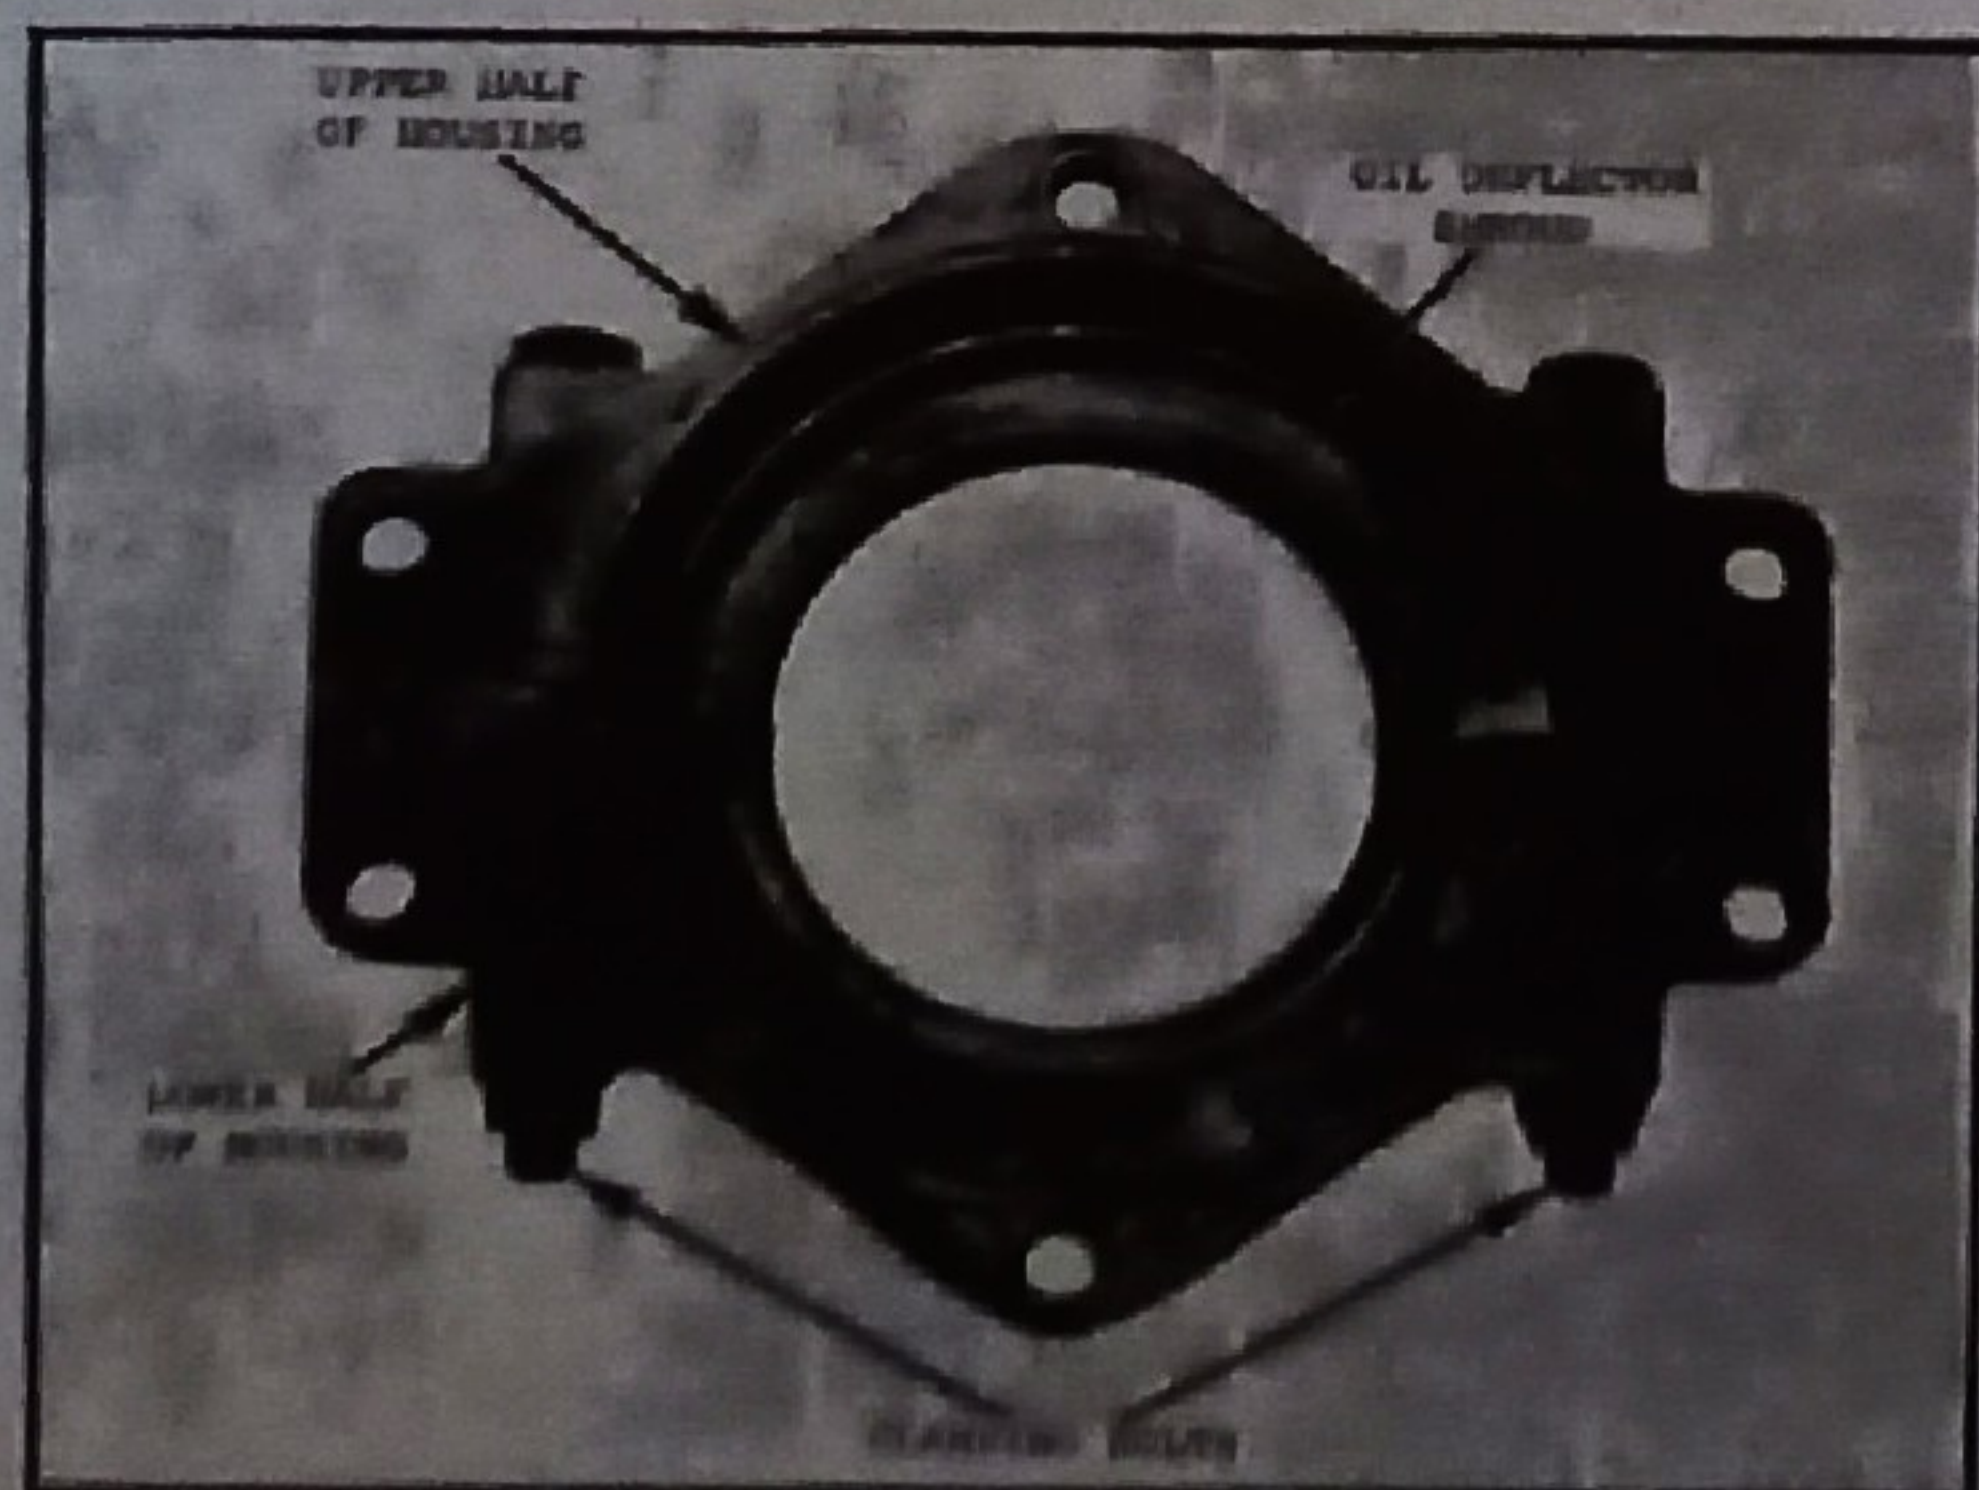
View of Upper and Lower Halves Showing Oil Deflector Shroud
